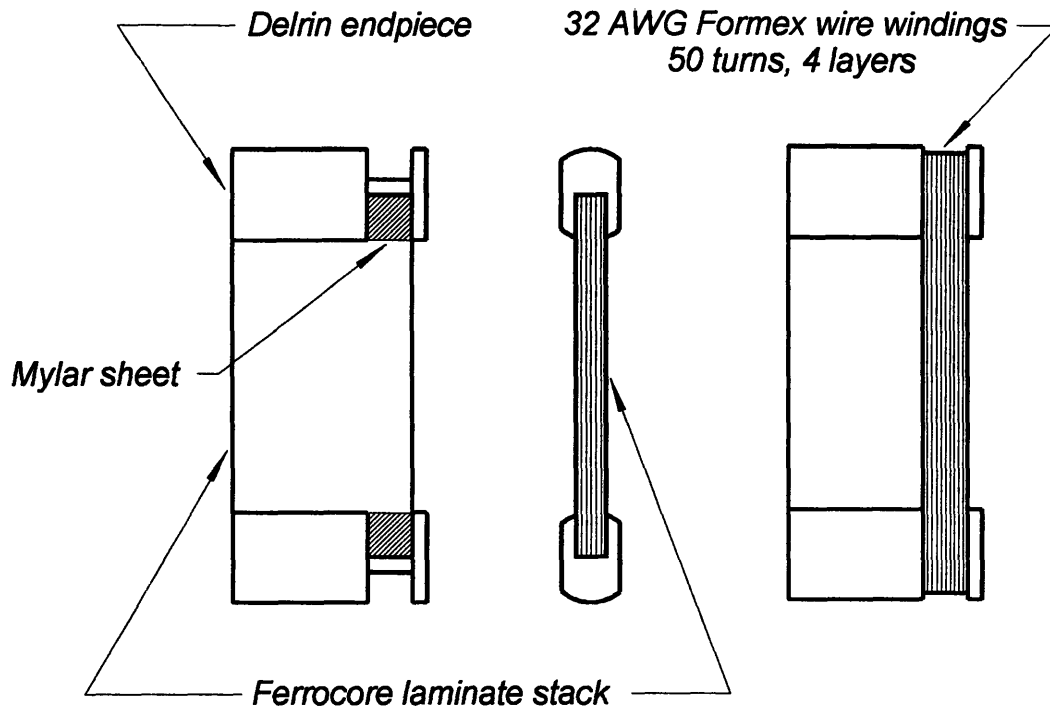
An individual electromagnet. The side view on the left shows a core without windings, to better illustrate the structure of the core/endpiece assembly. The mylar sheet is indispensable: in tests, fully half of coils made without it were electrically shorted to the core, a catastrophic failure rate.
